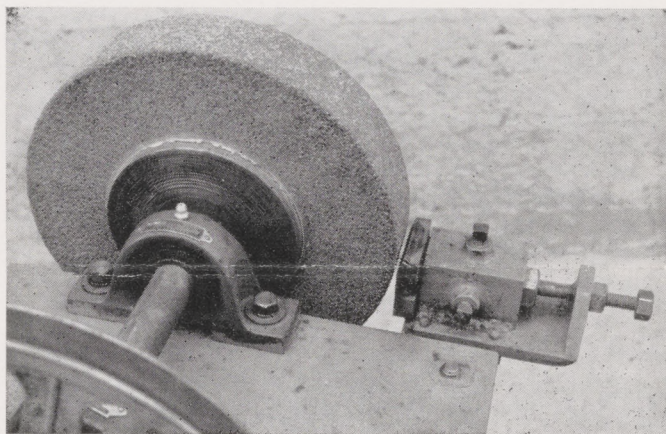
Abrasive wheel and adjustable shear block of segmenting machine to produce sheared seed.
